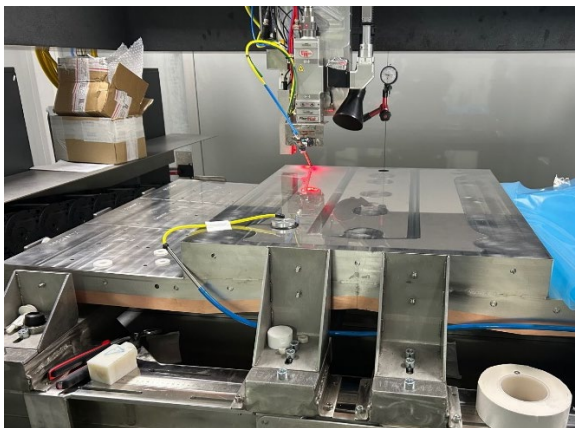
Pre-Series Panels caps laser welding at Alsymex
